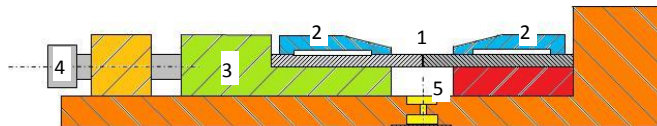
Schematic drawing of the used clamping device for welding of specimens (1) with vertical (2) and horizontal (3) fixture, screw (4) and channel for shielding gas at root side (5)
